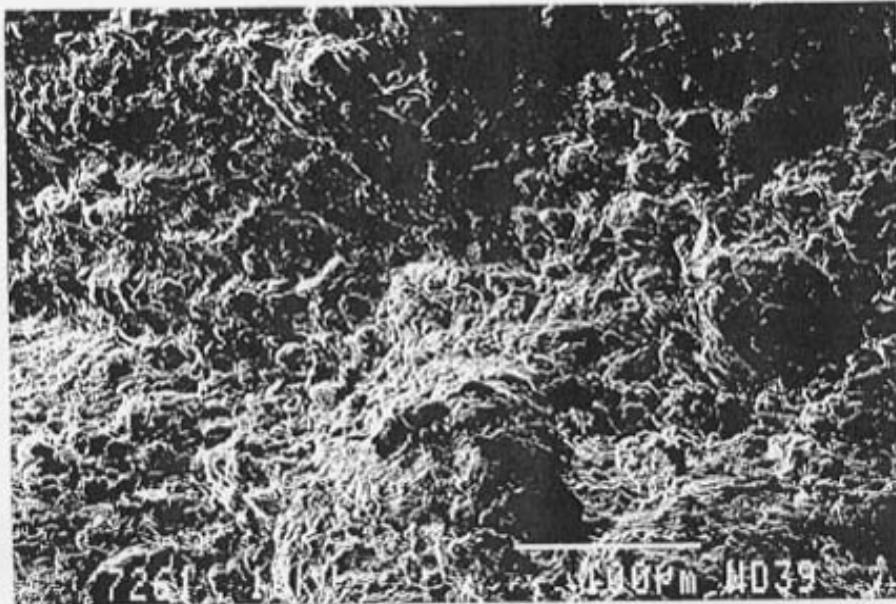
A2 weld fatigue crack striations from fig 51a
